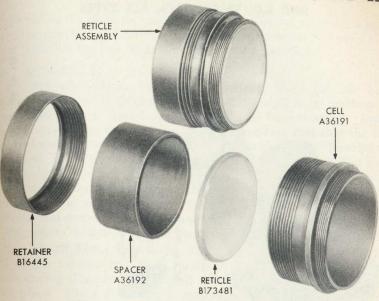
Field Glass, Type "EE"—Reticle Disassembled
